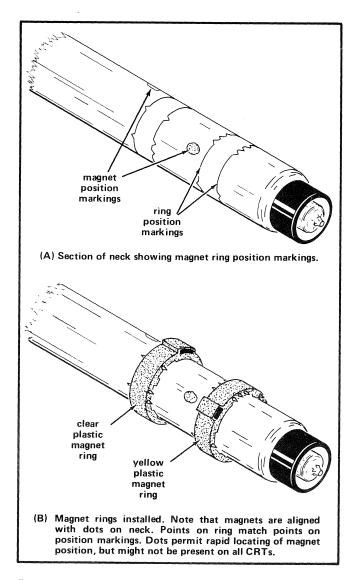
CRT Magnet ring location details. The magnet rings should be used only when supplied with the CRT.
